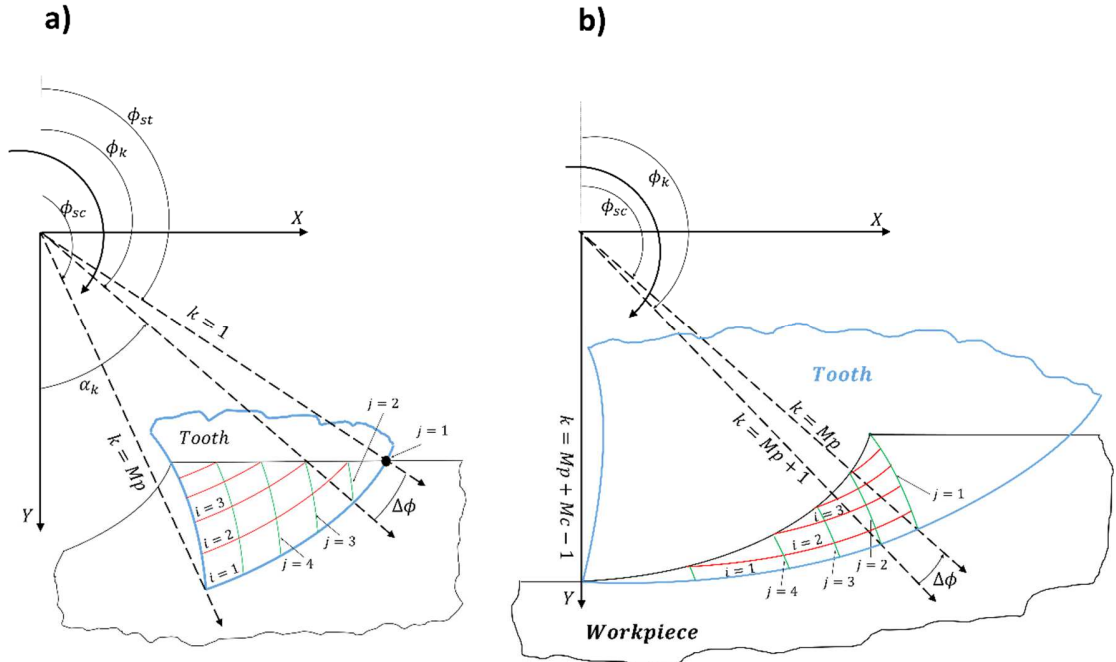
Down milling zones. a) unmachined zone scheme, b) machined zone scheme
